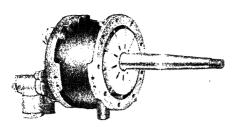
Fig. S.—Showing eccentrically-placed rotor and sliding vanes of windmill-driven compressor
